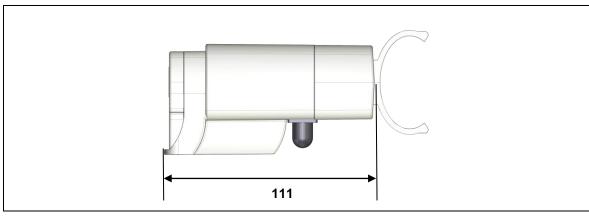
Dimensions of the ECS control unit, side view (in mm)
